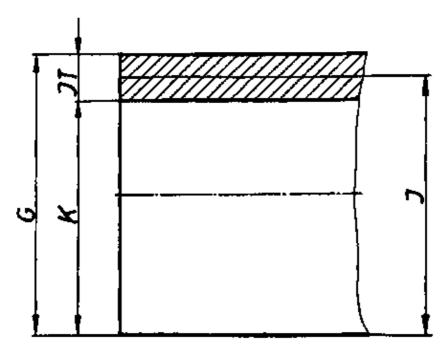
Tolerance representation at one side - external dimension
